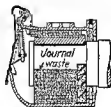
Car-wheel Journal Box with Oil-saturated Waste. Packing in Lower Half.
